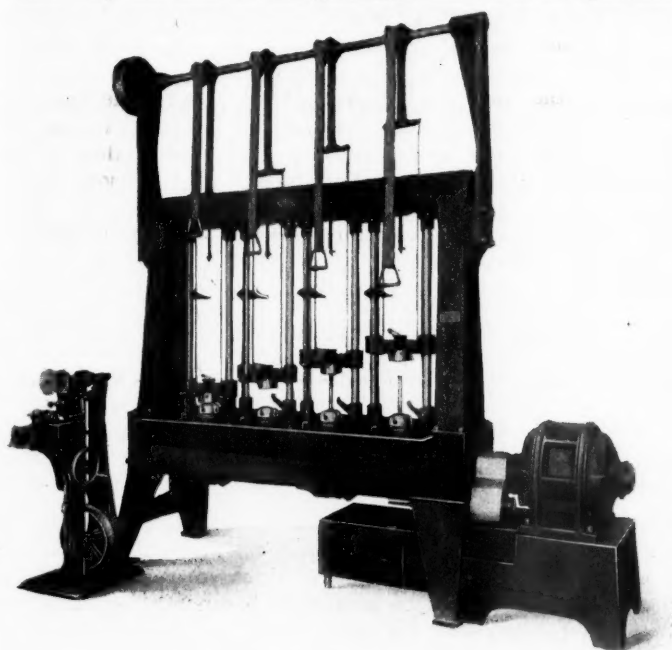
Staybolt Threading and Reducing Machine, with Special Grinder for Cutting Tools.
